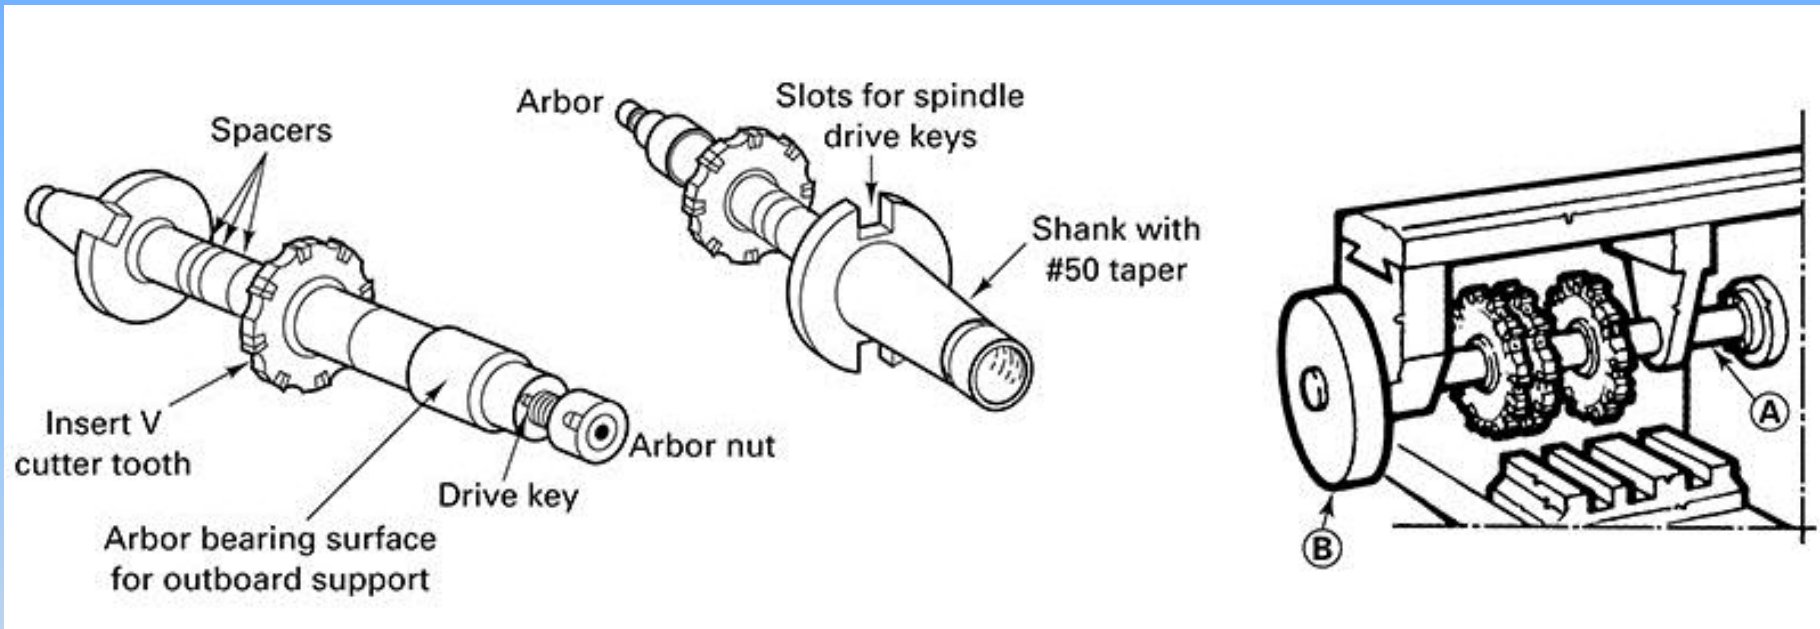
Arbor (two views) used on a horizontal-spindle milling machine on left. On right, a gangmilling setup showing three side-milling cutters mounted on an arbor (A) with an outboard flywheel (B).
